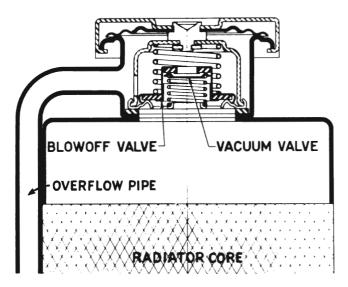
Pressure Type Radiator Filler Cap Installation
